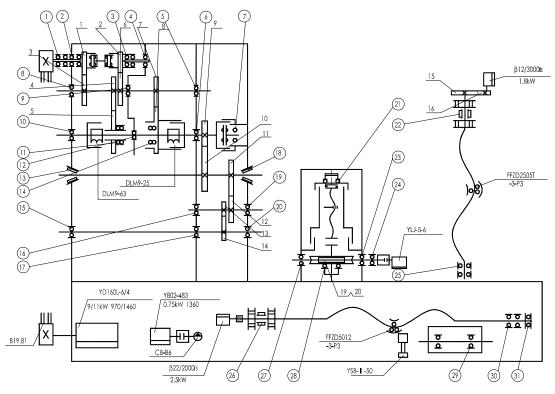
Schematic drawing of transmission system with double-speed motor of the machine
